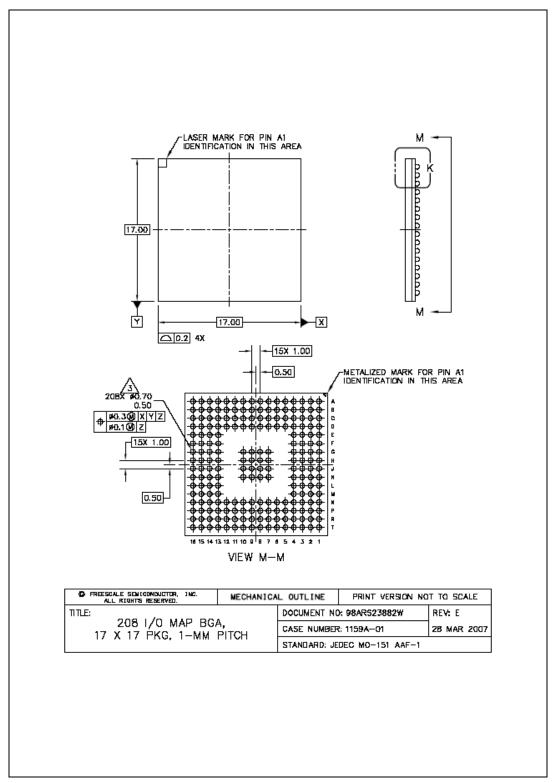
208 MAPBGA package mechanical drawing (Part 1 of 2)
